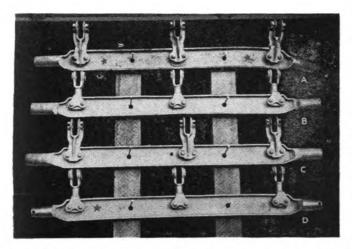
Steps in the repair and reclamation of a clasp brake beam —(A) Tested at 42,000 lb.; (B) Veed for welding; (C) Welded; (D) Finished
